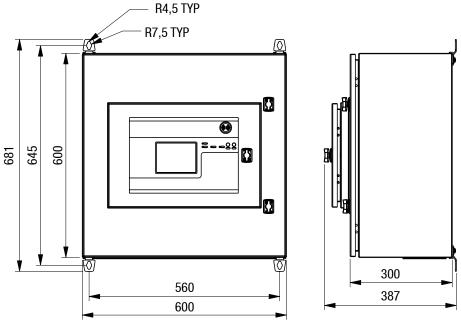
Touchpoint Pro Small Wall Mounted Enclosure - Mild Steel
